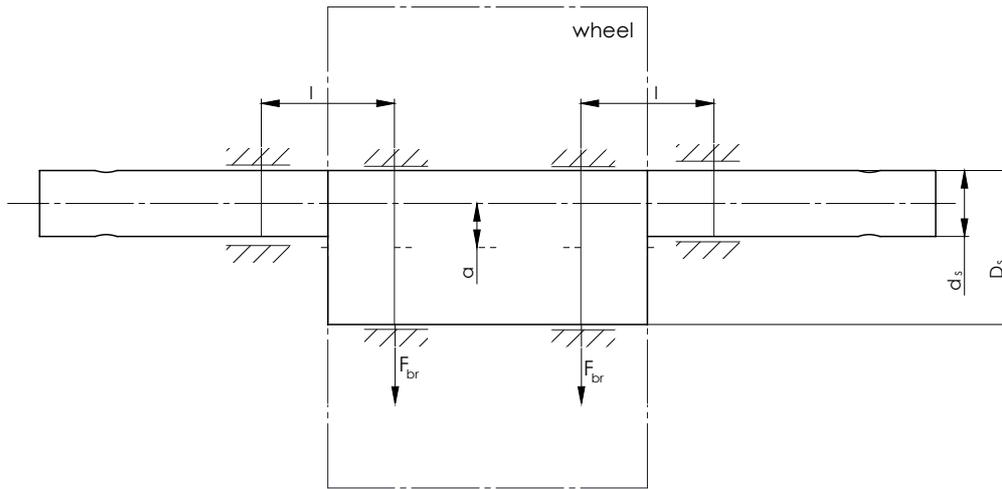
Eccentric shaft bearing scheme and applied forces
